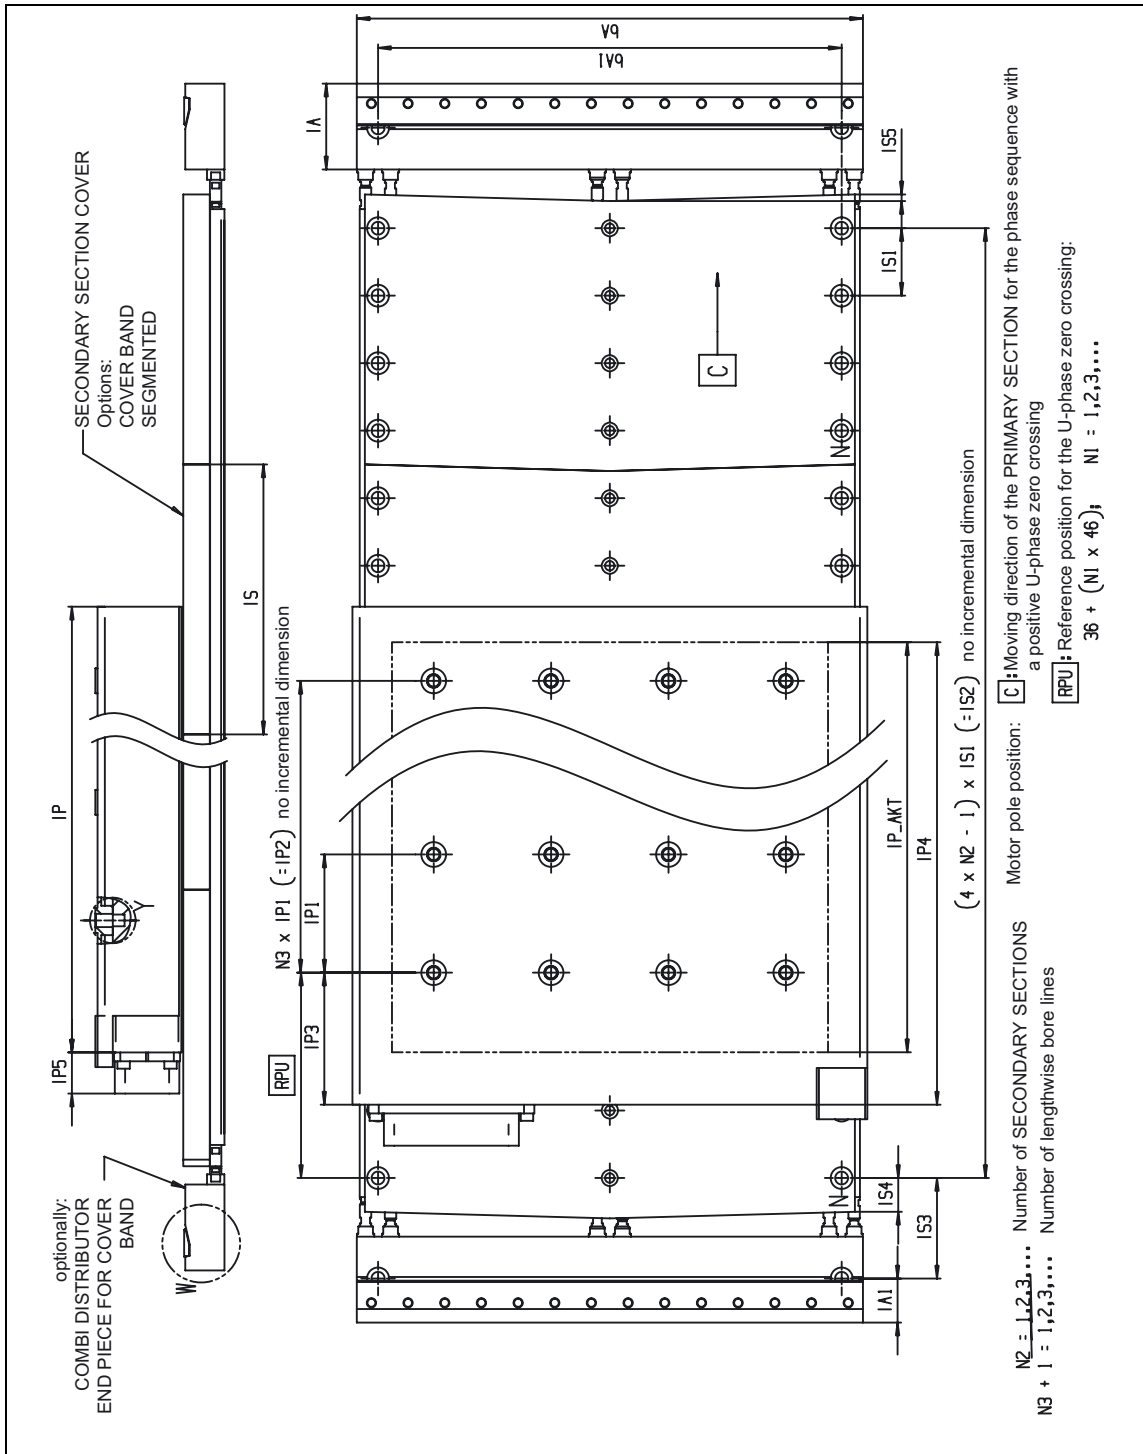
Mounting dimensions for the 1FN3900 motor models: Sections and details; except: 1FN3900-4WB00 and 1FN3900-4WC00
